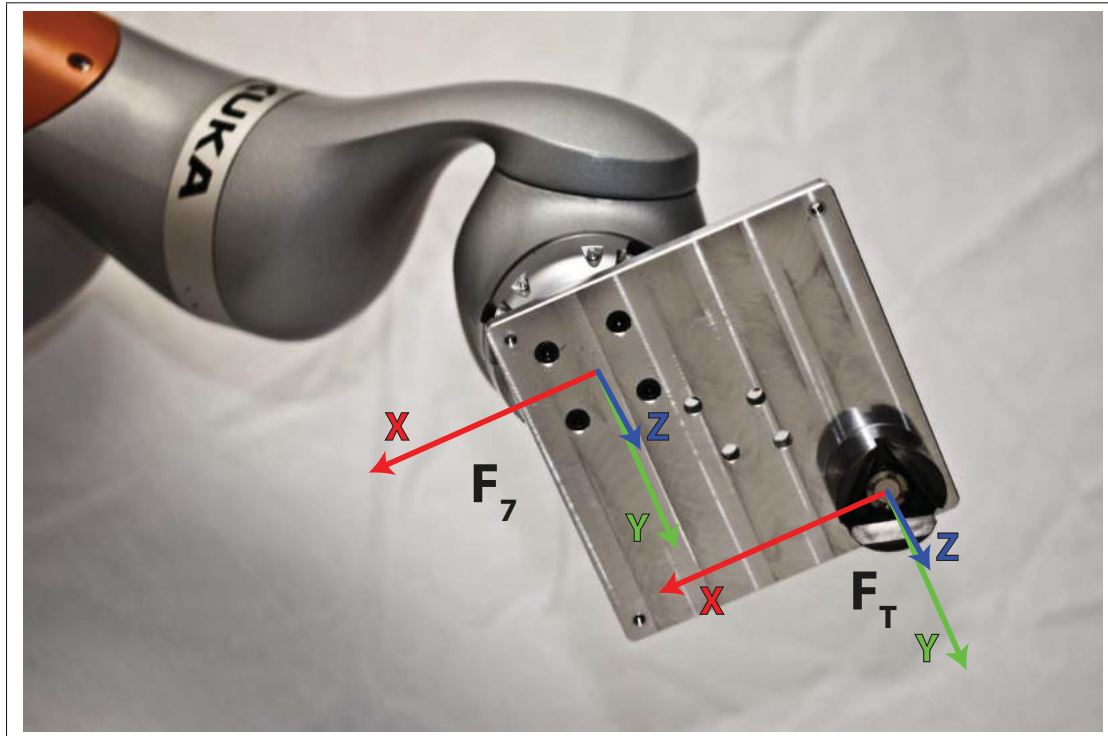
Robot calibration tool with trihedral kinematic coupling. For both the flange (F_7) and tool (F_T) frames, the xy -plane is parallel to the plate
